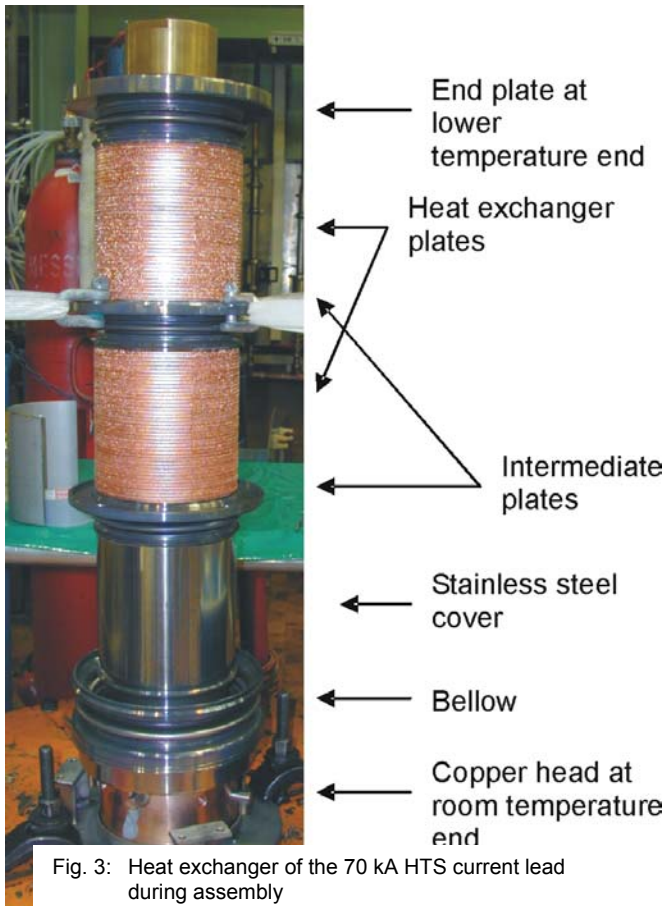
Heat exchanger of the 70 kA HTS current lead during assembly
